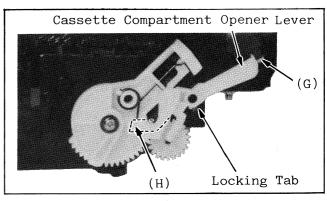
Adjustment of Cassette Up Gears-(10)
